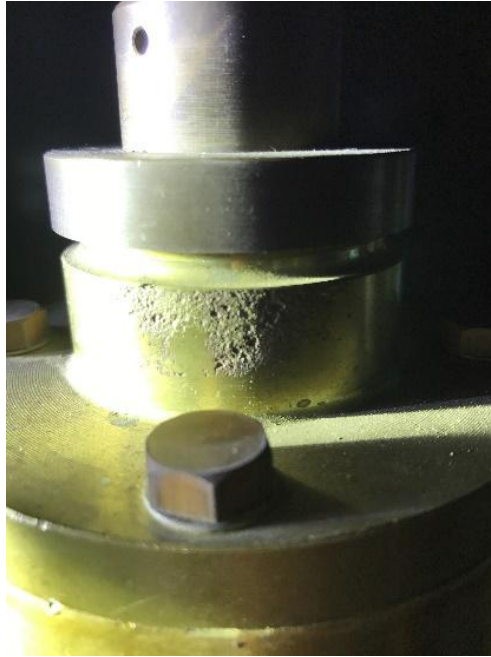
Photo of pitting on a VT chamber spout which produced TEV signals.
